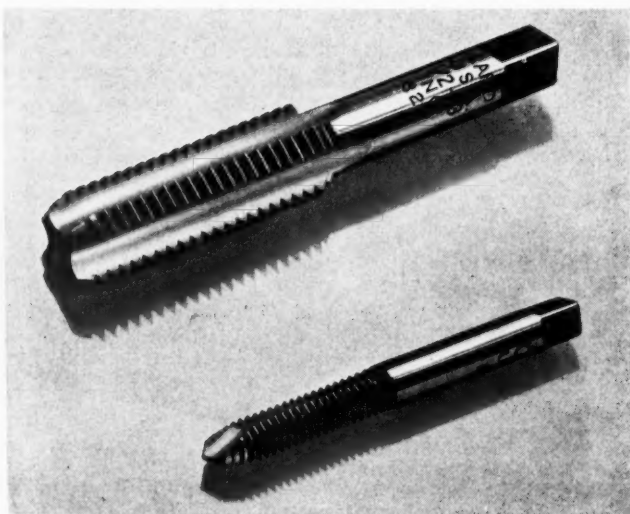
(Above) Straight-fluted Tap, Square at End, for Bottoming Holes; (Below) Gun or Chip-driver Type Tap Often Used for Tapping Zinc Die-castings
